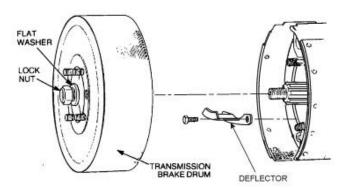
Output Shaft Cover Oils Seal Removal (Rear)
